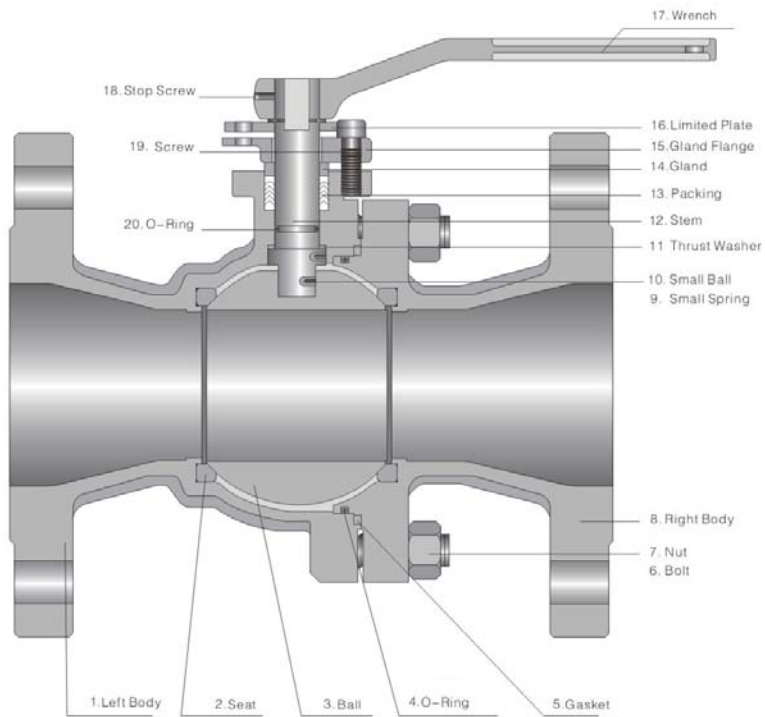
2PC Reduced Bore Floating Ball Valve Major Features of Type BV2001
